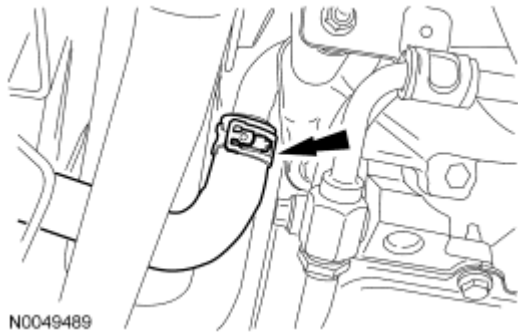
Disconnecting Coolant Hose From Oil Cooler
